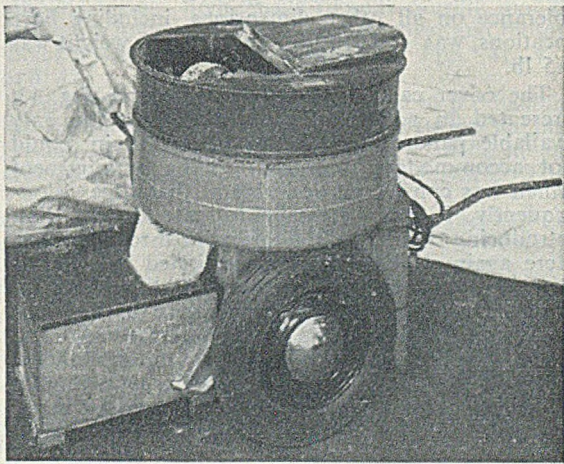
Portable Muller for Resin/Sand Mixtures.
